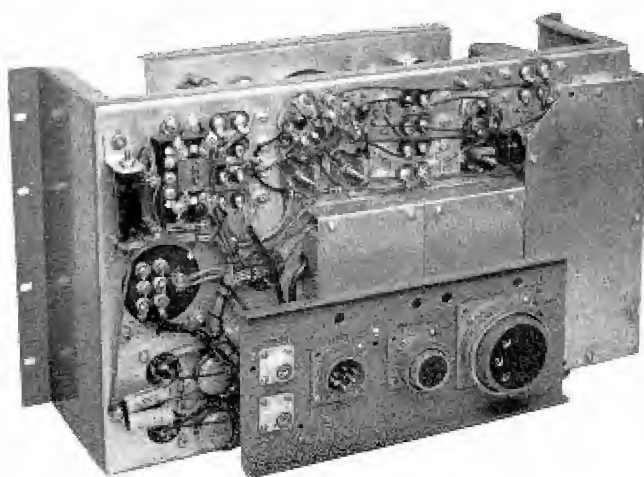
Rear of the receiver control chassis showing wiring, connections and shielding of low level stages.
